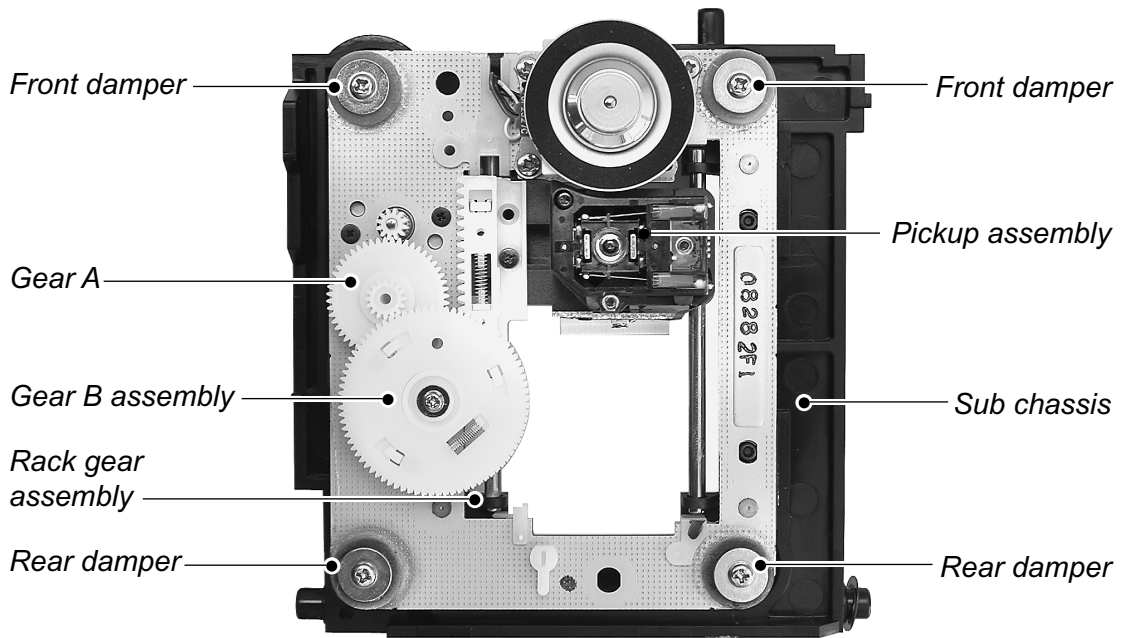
Pickup mechanism chassis assembly (Top side)
